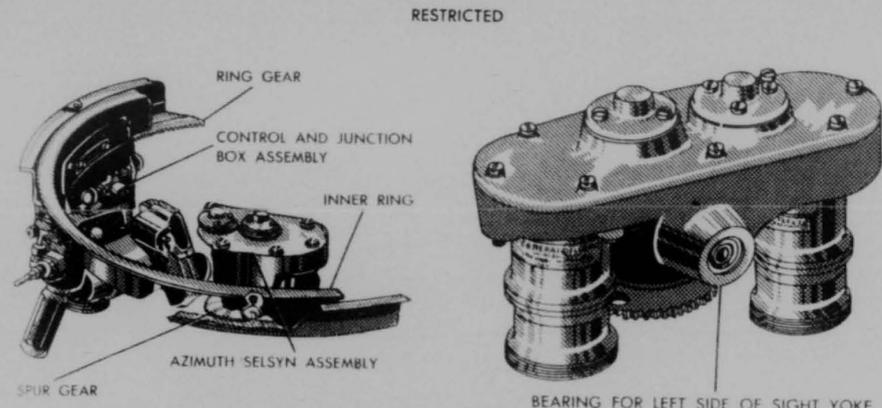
Cutaway to Show How Main Drive Gear Engages Internal Gear on Stationary Outer Ring.
